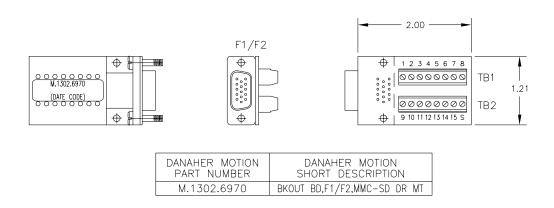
Feedback Port (F1 and F2) Breakout Board Dimensions
